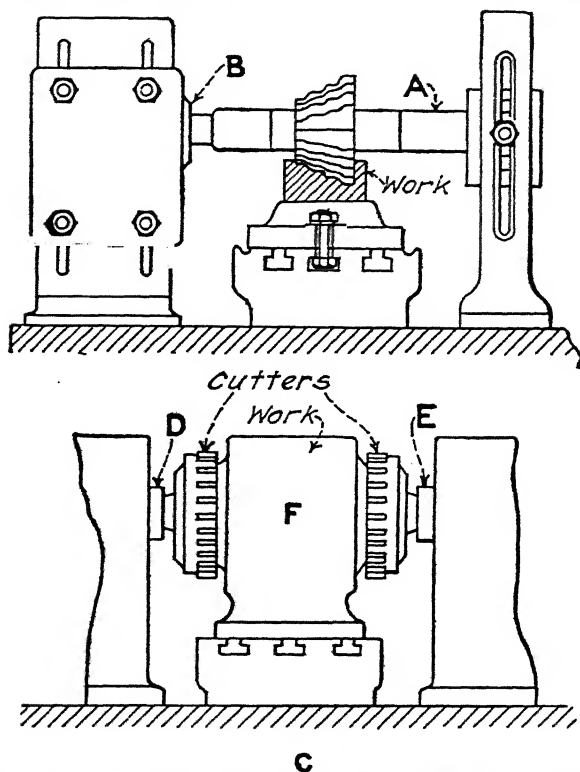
Lincoln Type and Duplex Milling Machine Diagrams
